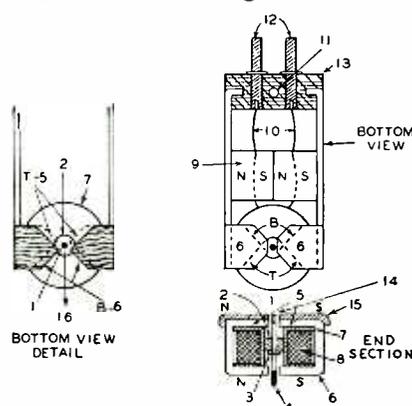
The modified Clarkstan pickup. The numbered parts are: 1, the tubular needle; 2, visco-elastic pivot; 3, wire ring; 4, jewel tip; 5, top poles; 6, bottom poles; 7, coil spool; 8, coil; 9, Alnico magnets; 10, output leads; 11, tapped hole for case screw; 12, pickup terminals; 13, insulating block; 14, new hole in case top for needle clearance; 15, top side of case; 16, groove motion direction; T, new shape of top poles; B, new shape of bottom poles.
